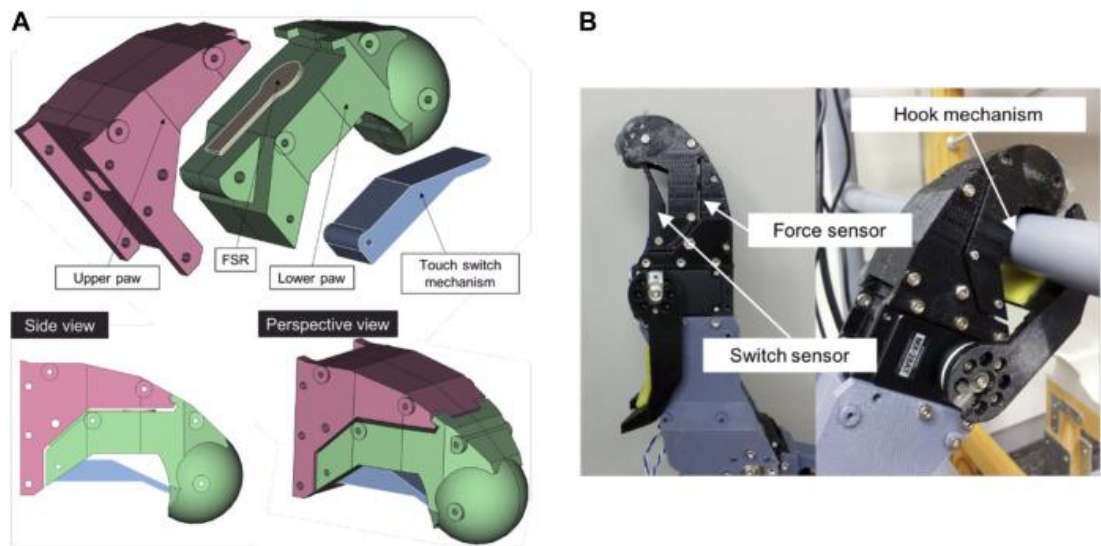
The end effector. (A) CAD drawings (B) The 3D-printed effector.
